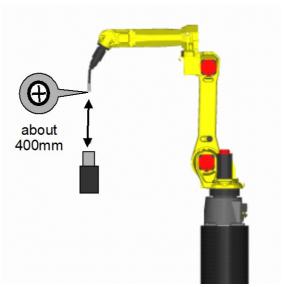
(e) Installation example for arc welding
